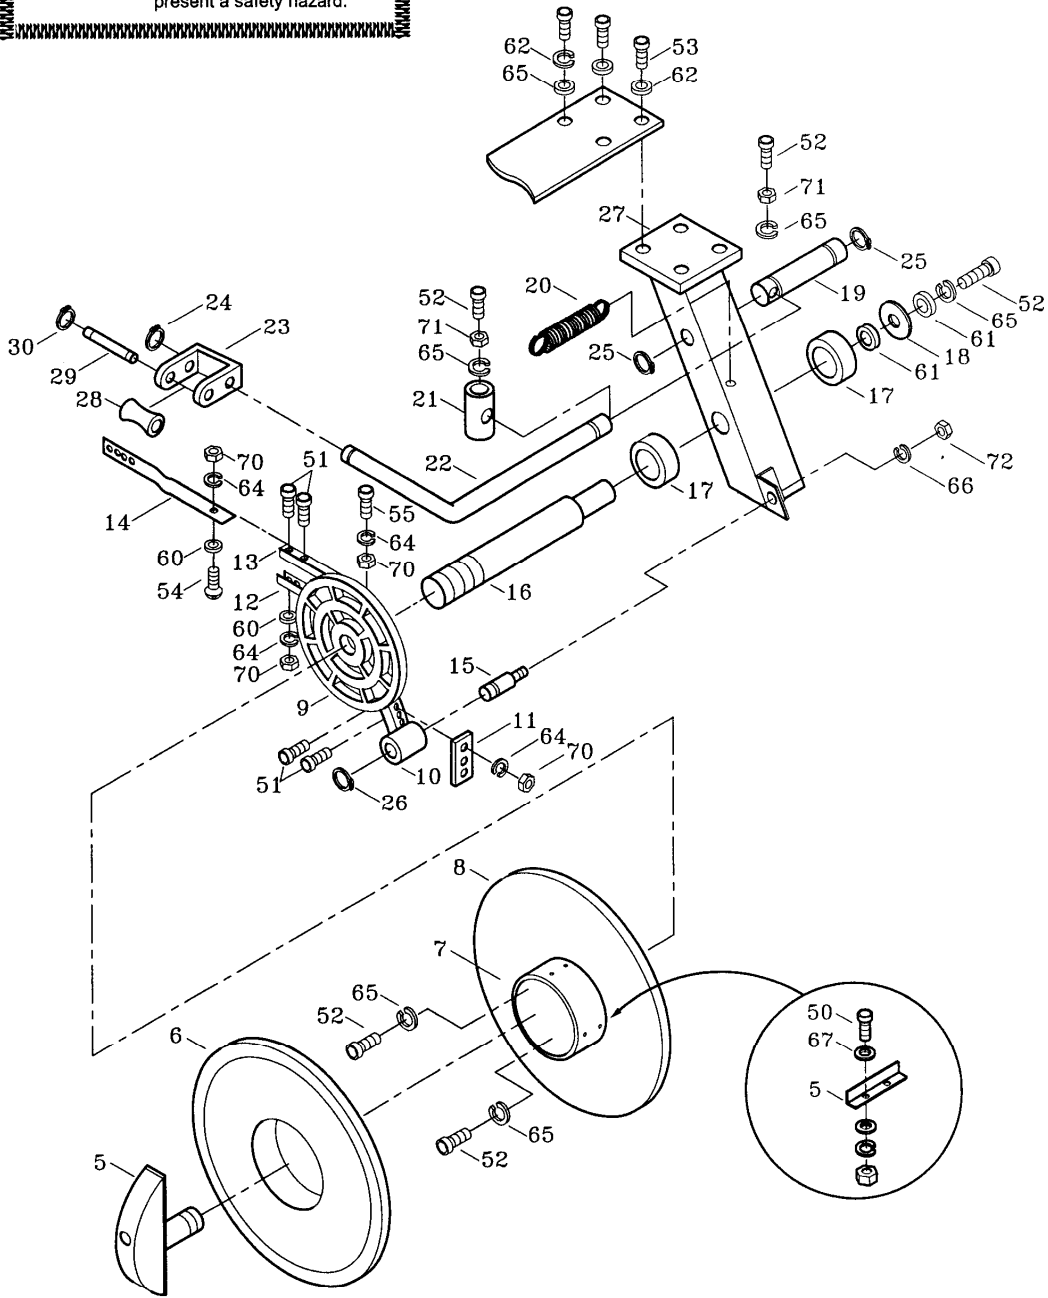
DISPENSER & BRAKE ASSEMBLY COMPONENTS
